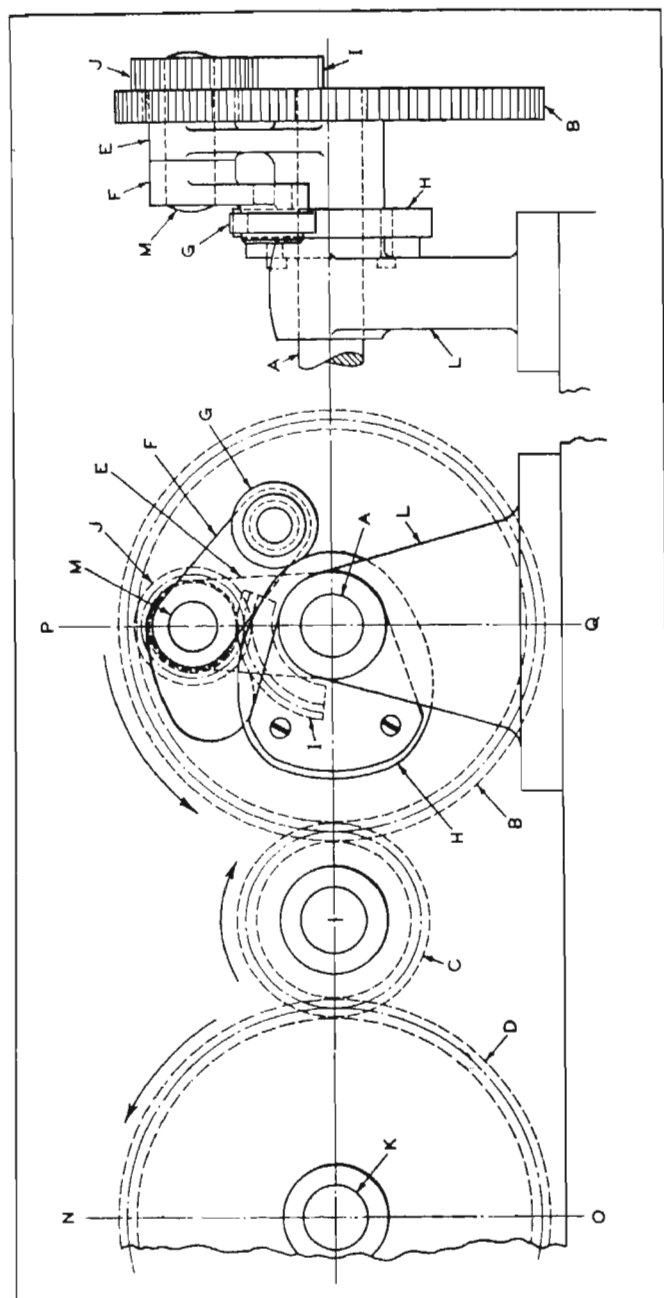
Mechanism for Producing Irregular Rotation of Shaft A and Constant-speed Rotation of Shaft K from the Driving Gear C.
